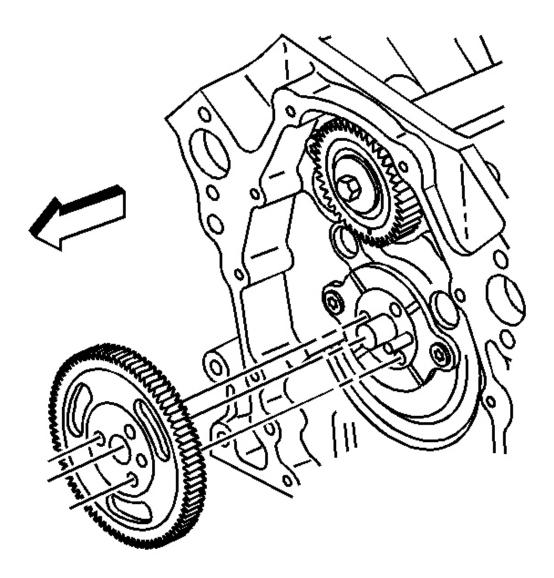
View Of Balance Shaft Drive Gear Courtesy of GENERAL MOTORS CORP.
